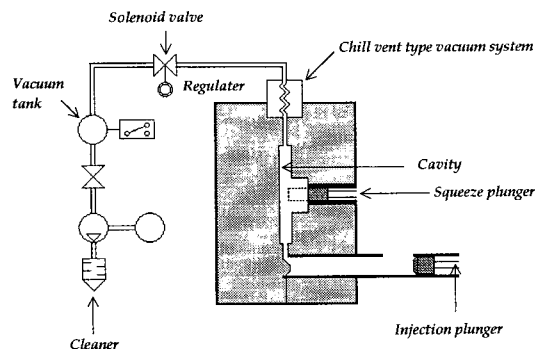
Schematic drawing of partial squeeze and vacuum die casting machinery
